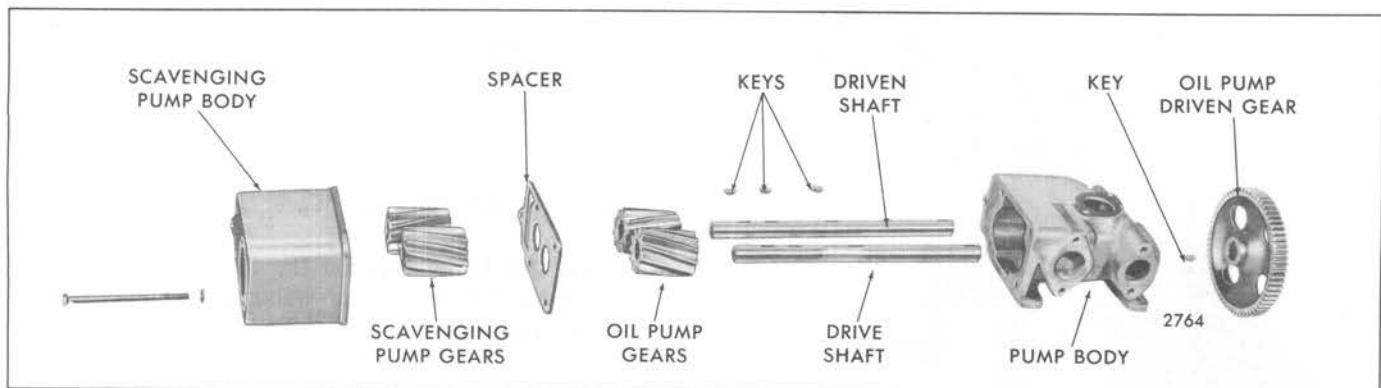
Lubricating Oil Pump Details and Relative Location of Parts (12V-92 and 16V-92 Engines)
